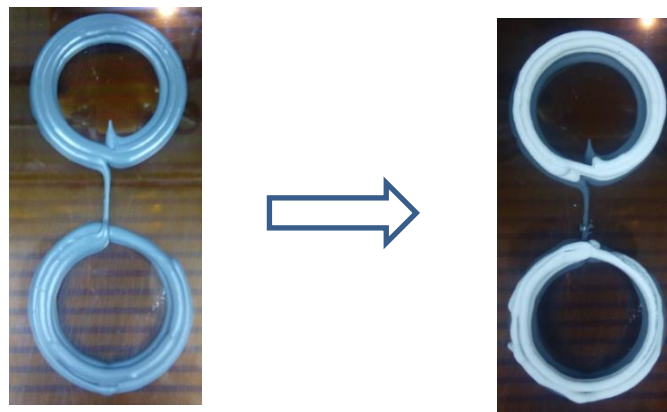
Direct gelcast printing of multi-material using the CAD design.
